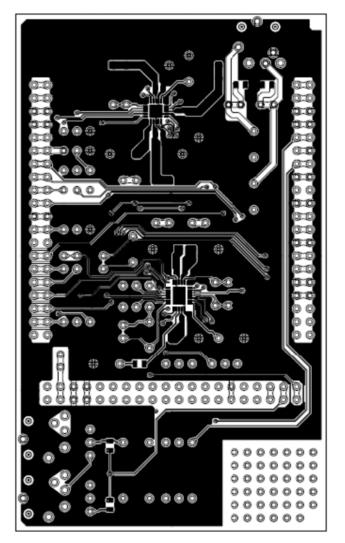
DEM-PCM1870RHF/1774RGP-A Board Layout—Component Side
